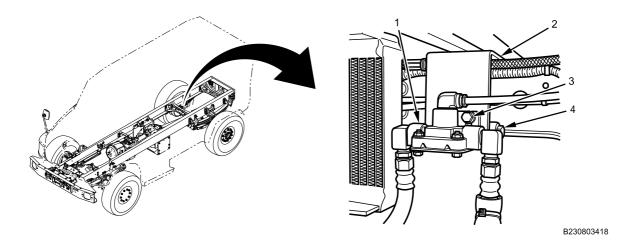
Transfer Case Oil Cooler and Air Brake Quick Release Valves Location.
